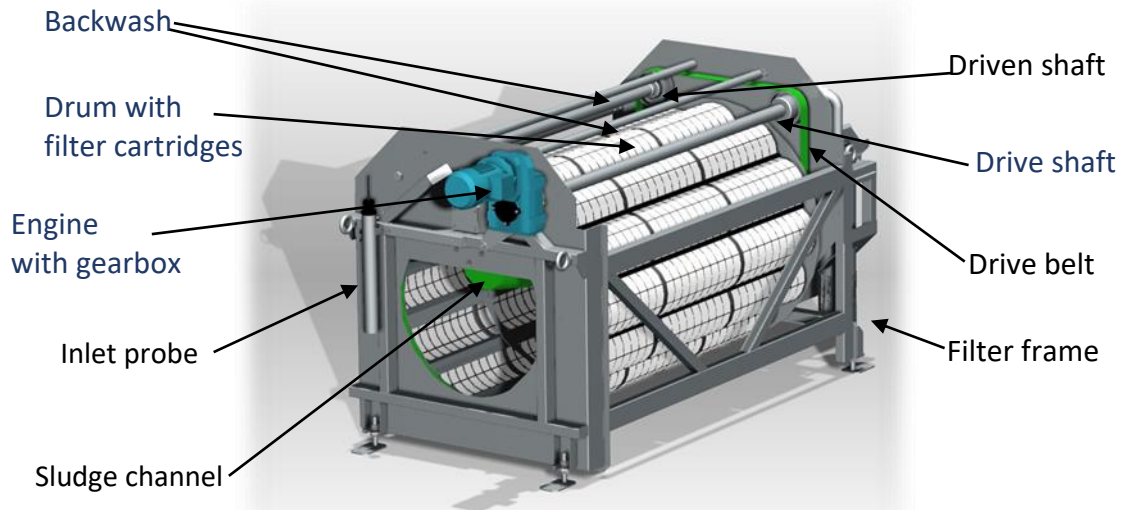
Parts of the unit – viewed from the inlet side (FBB)
